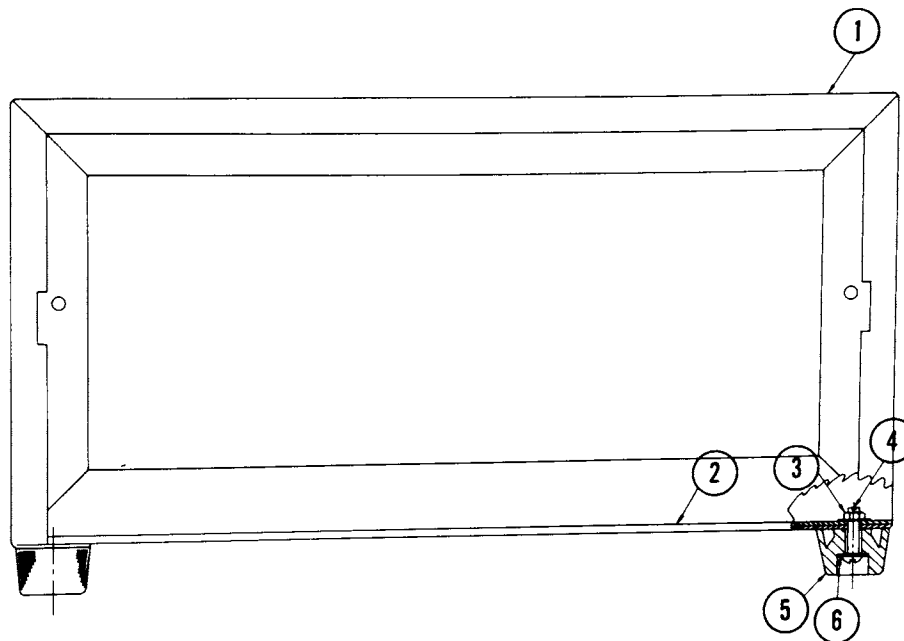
Cabinet Assembly, WW-4703-1D (Part of Final Assembly, Figure 1).
